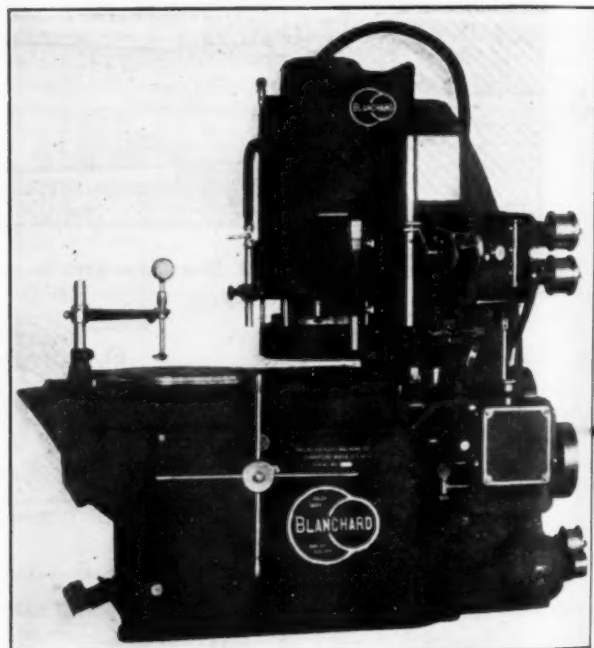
VERTICAL GRINDER USING SPINDLE SHOWN IN FIG. 7
